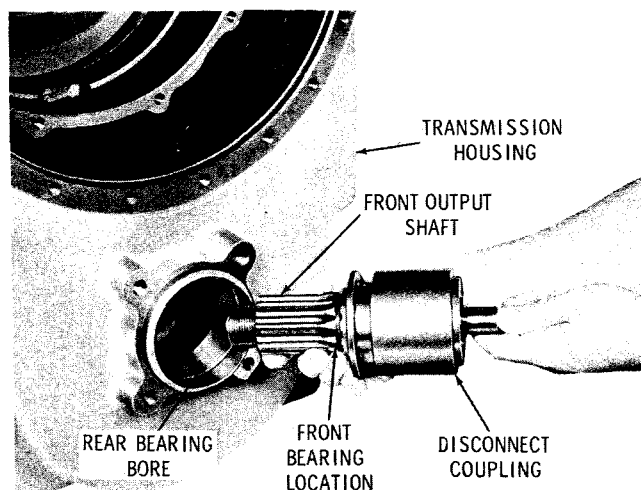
Installing front output shaft and disconnect coupling (-1 models with two-piece output shaft)
